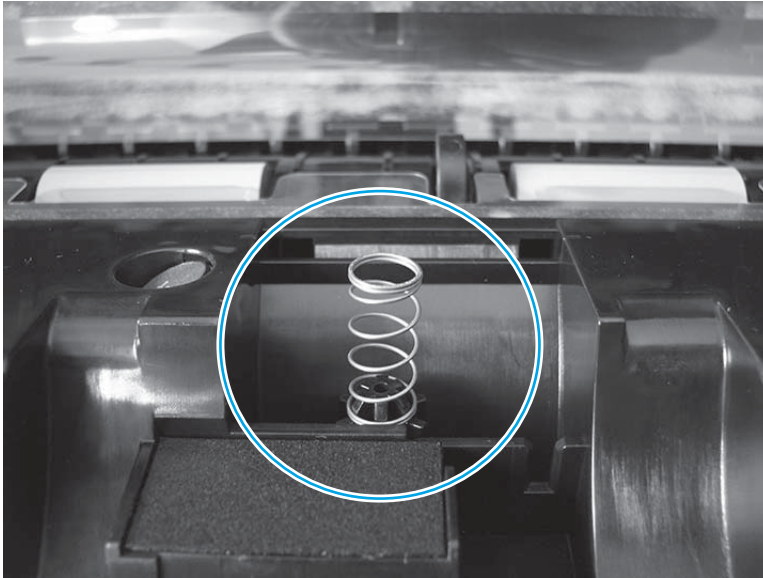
Remove the document-feeder separation pad and holder (M680; 3 of 3)
